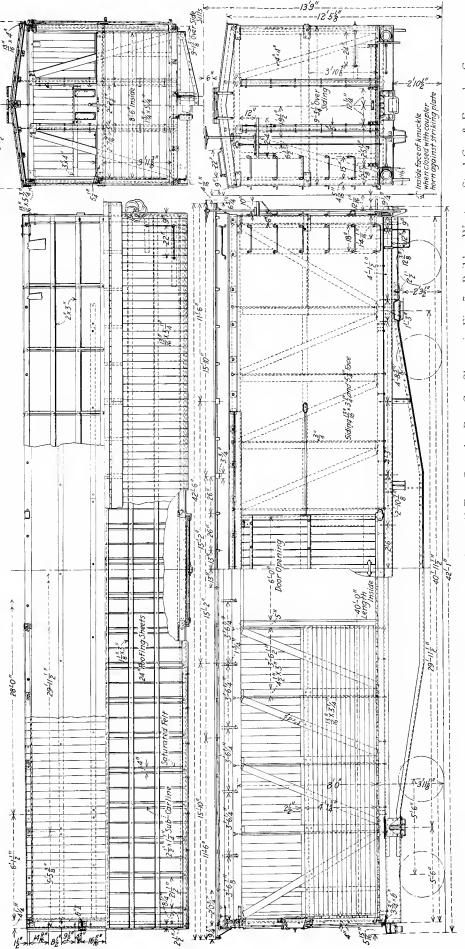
Elevations, Plan and Sections of Ann Arbor Steel Underframe 40-Ton Capacity Box Car Shown in Fig. 7. Builder, Western Steel Car & Foundry Company.
